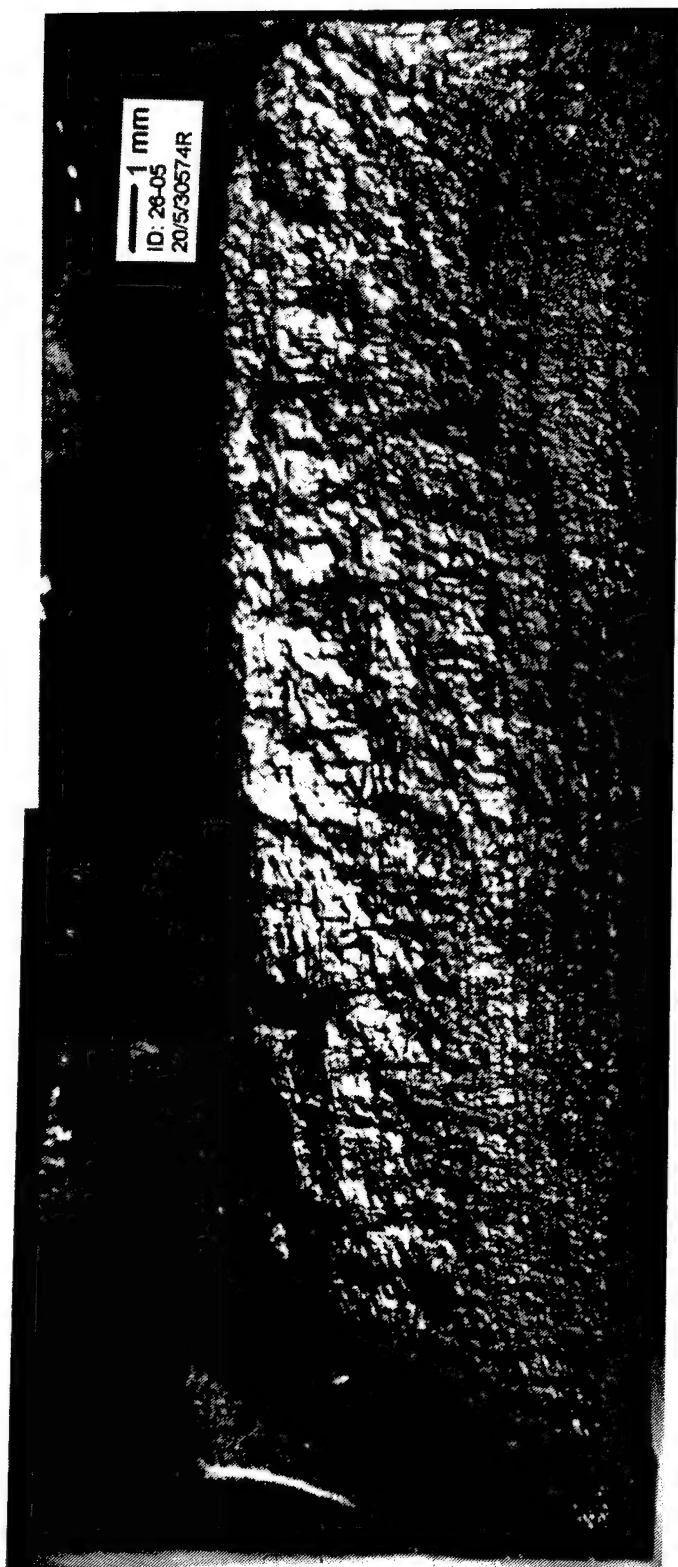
Fatigue fracture surface of the HSLA-80 but weld sample subjected to random loading:
